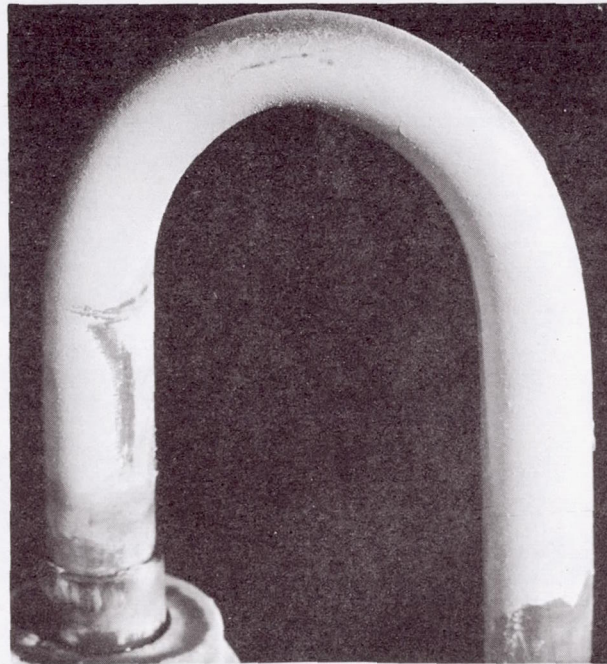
Oxidizer Fill and Drain Tube Crack, External View
